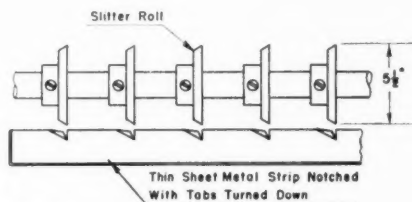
Diagrammatic sketch showing method of positioning slitter rolls.
